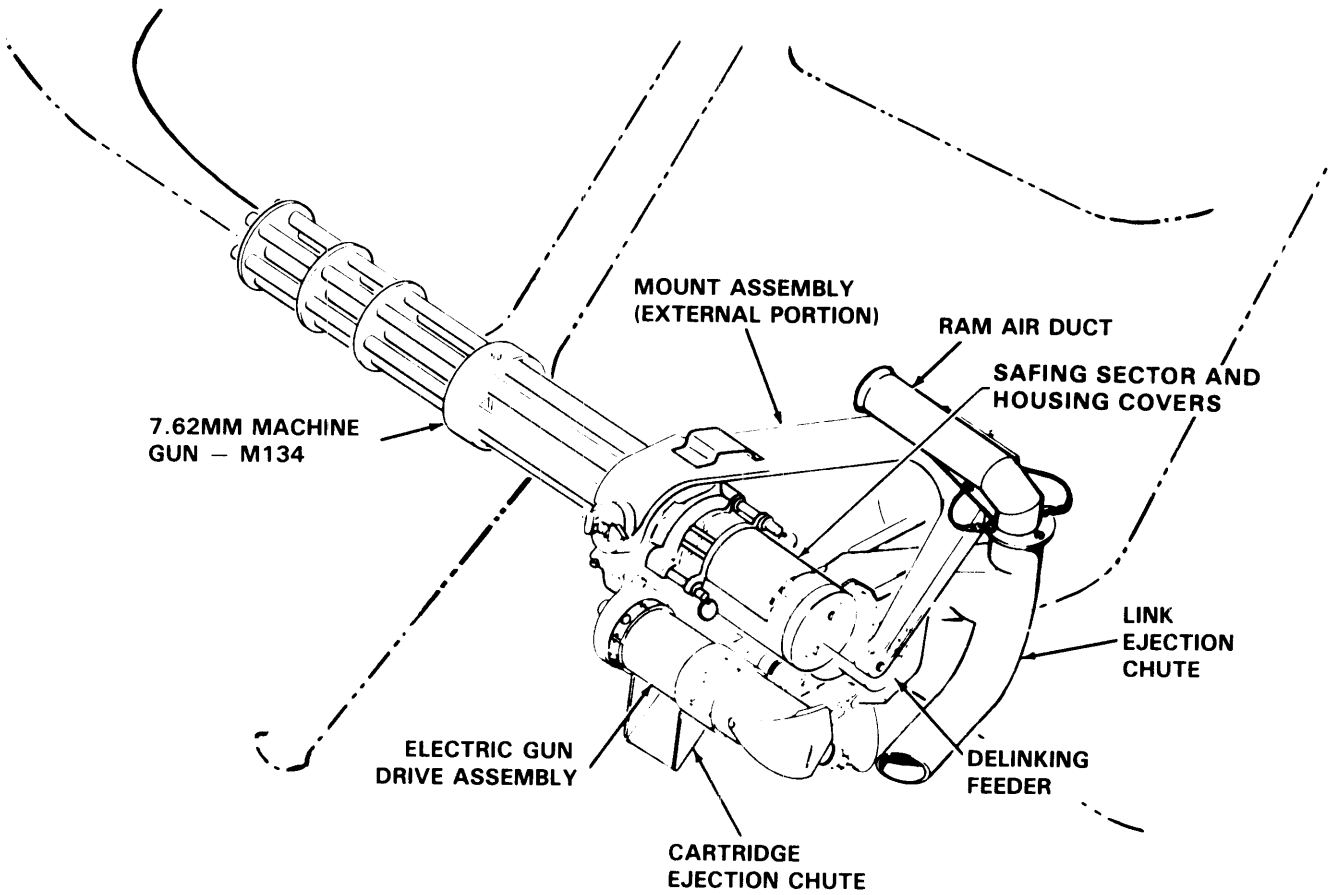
Armament Installation (Sheet 1 of 4) A
